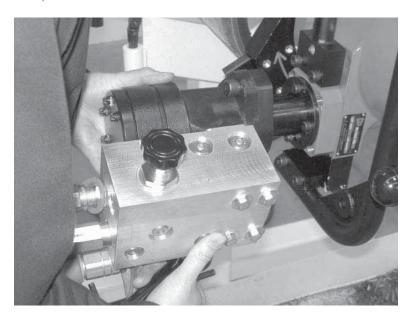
The hydraulic motor is interchangeable with the air motor.
